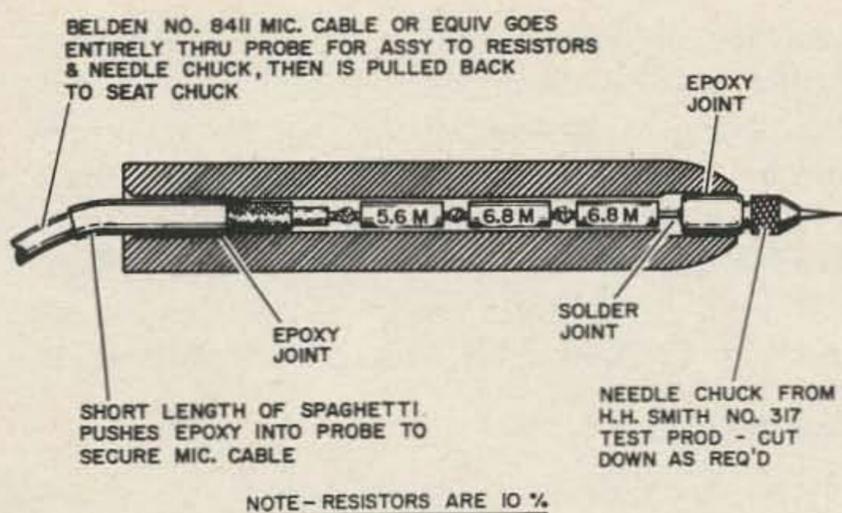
Test prod construction. Simple design is permanently assembled with epoxy cement.
